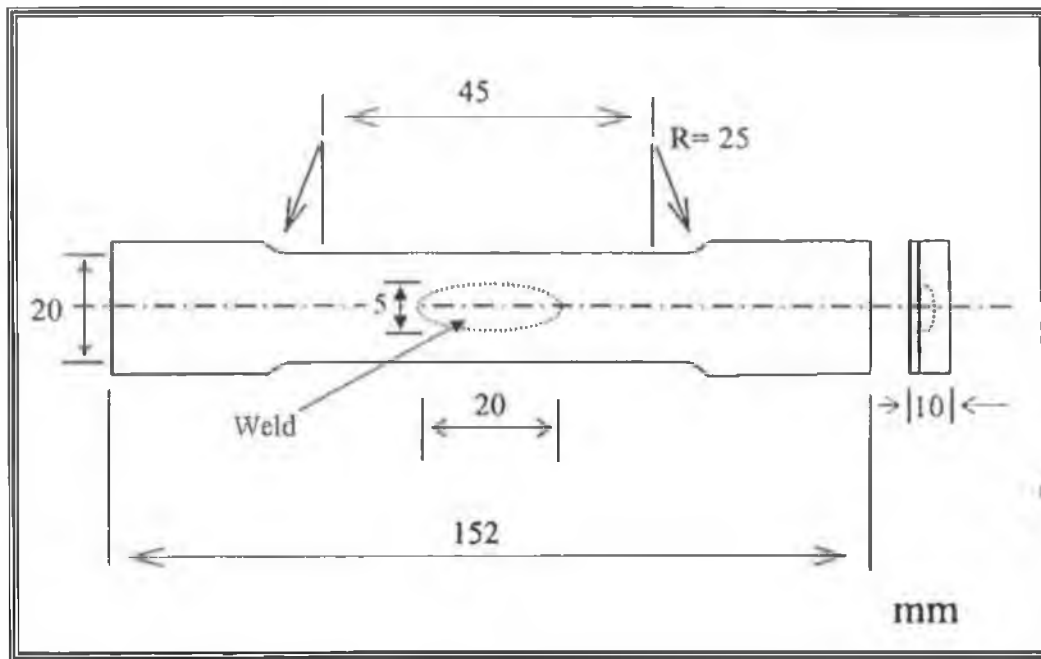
Geometry of the spot welded fatigue/tensile samples used in each test.
